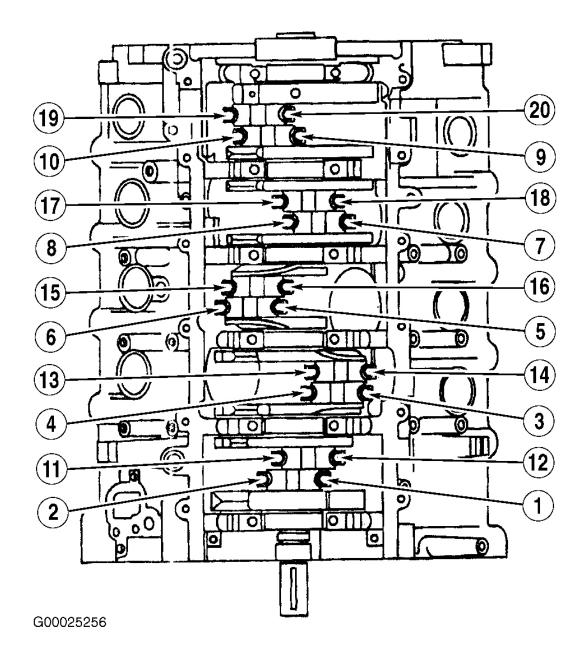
Connecting Rod Bearing Cap Bolt Tightening Sequence Courtesy of FORD MOTOR CO.
